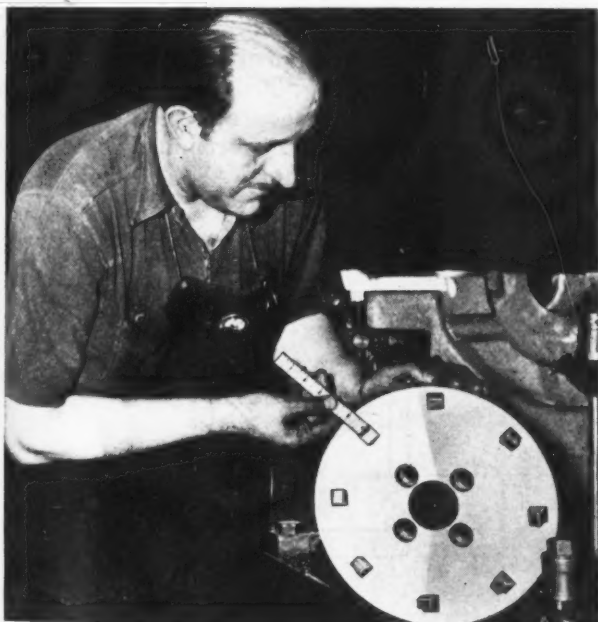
Checking the Setting of Tools in Staggered-tooth Vertical Milling Cutter
